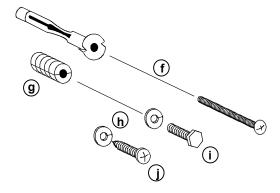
Wall mount bracket mounting hole selection
